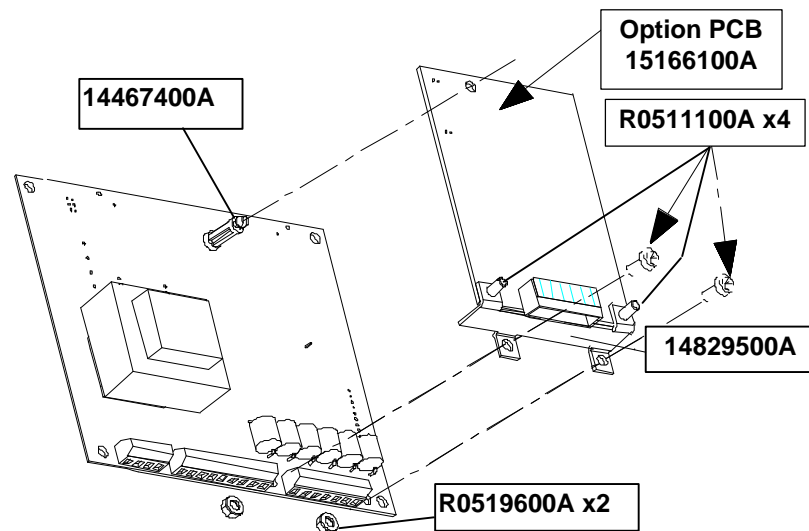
Mounting PROFIBUS Option PCB in Harsh Environment Enclosure
